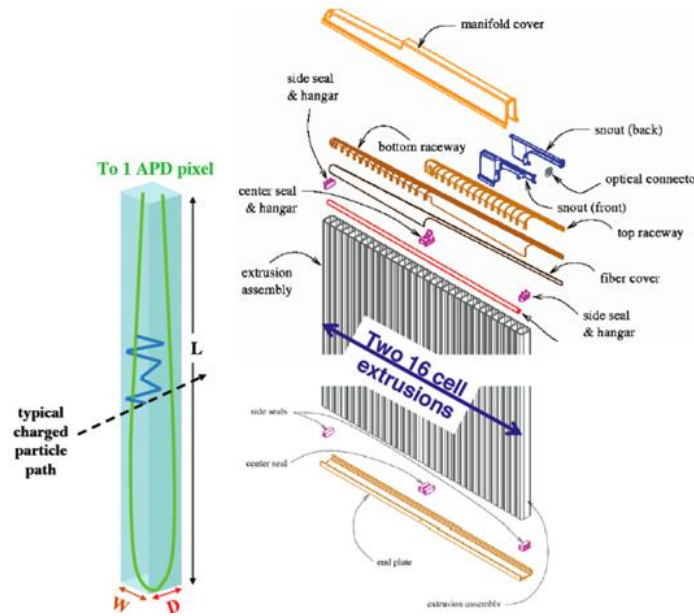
A PVC cell with WLS fiber looped through, showing the trajectory of a particle (right), and a 16-cell extrusion with manifold cover and other assembly pieces.
